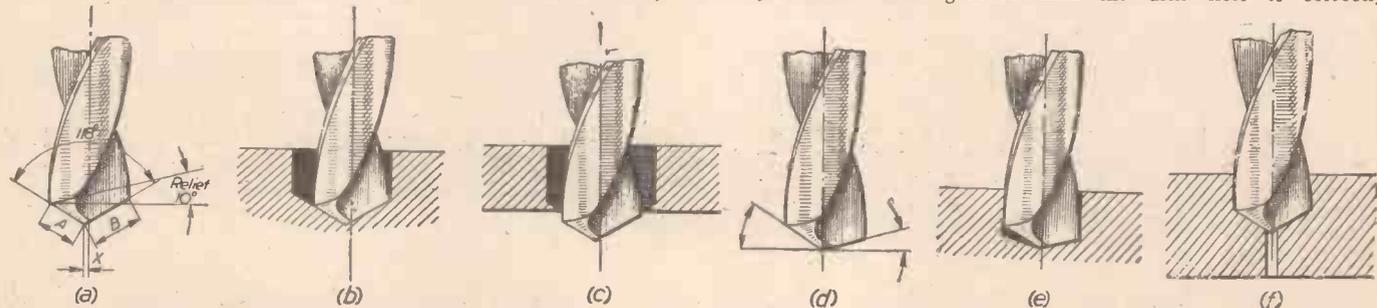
a. The unequal lip drill. b. The oversize drilled hole. c. The inevitable ridge. d. The unequal angle drill. e. The one-lip cutting drill. f. The not-too-good pilot.
